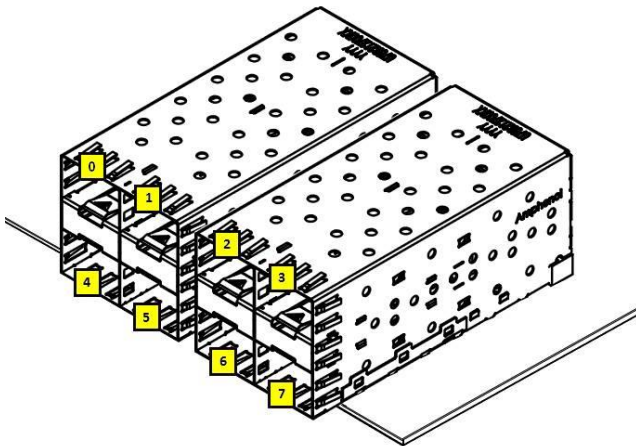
SFP TO PRINthead BOARD MAPPING
